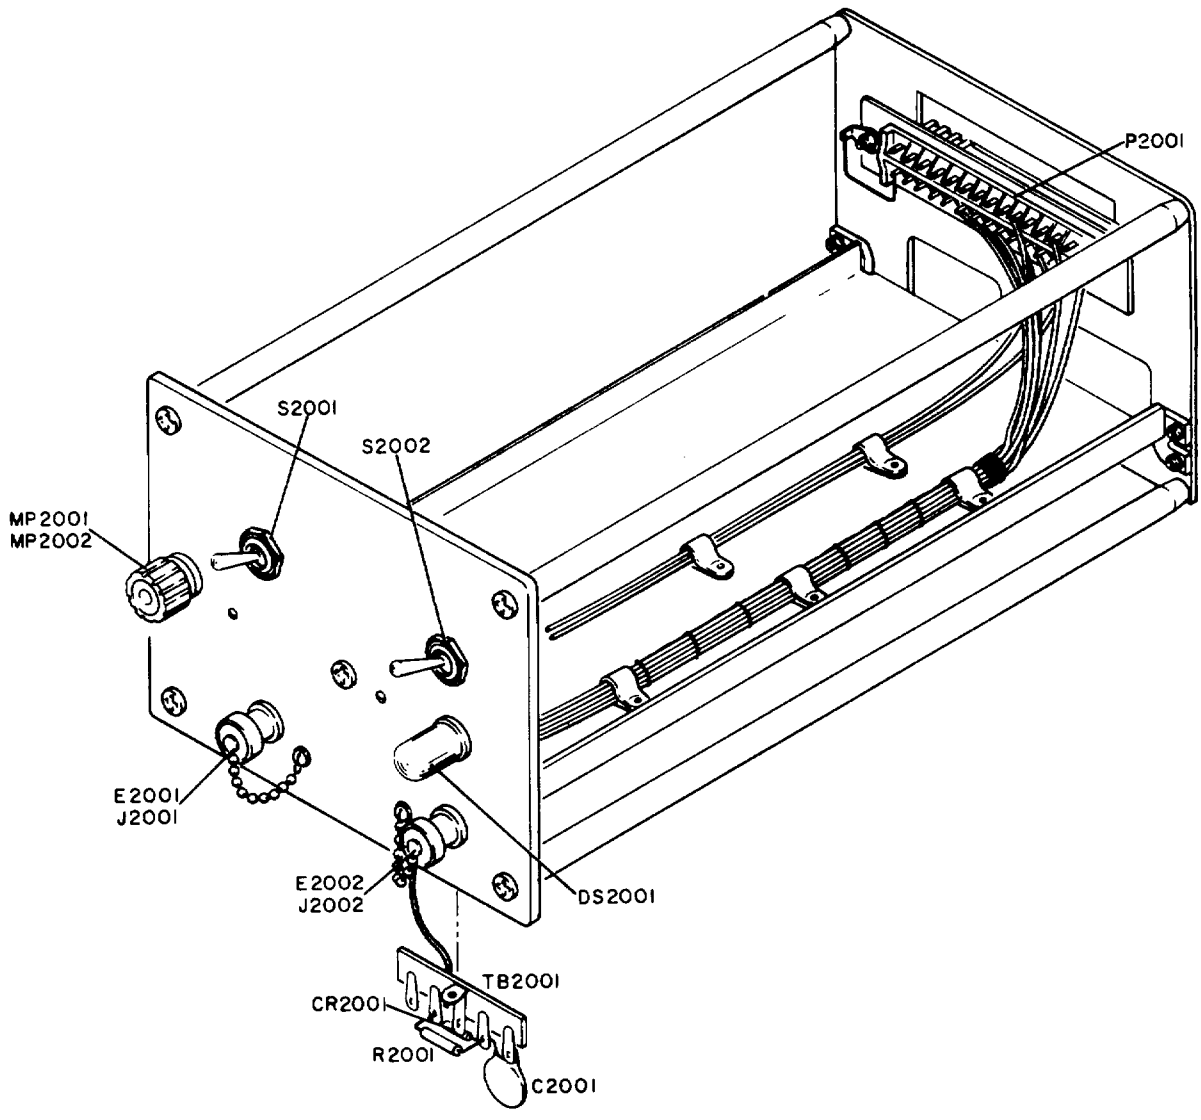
MX-3078/USM Horizontal Auxiliary Plug-In Unit, Location of Parts
